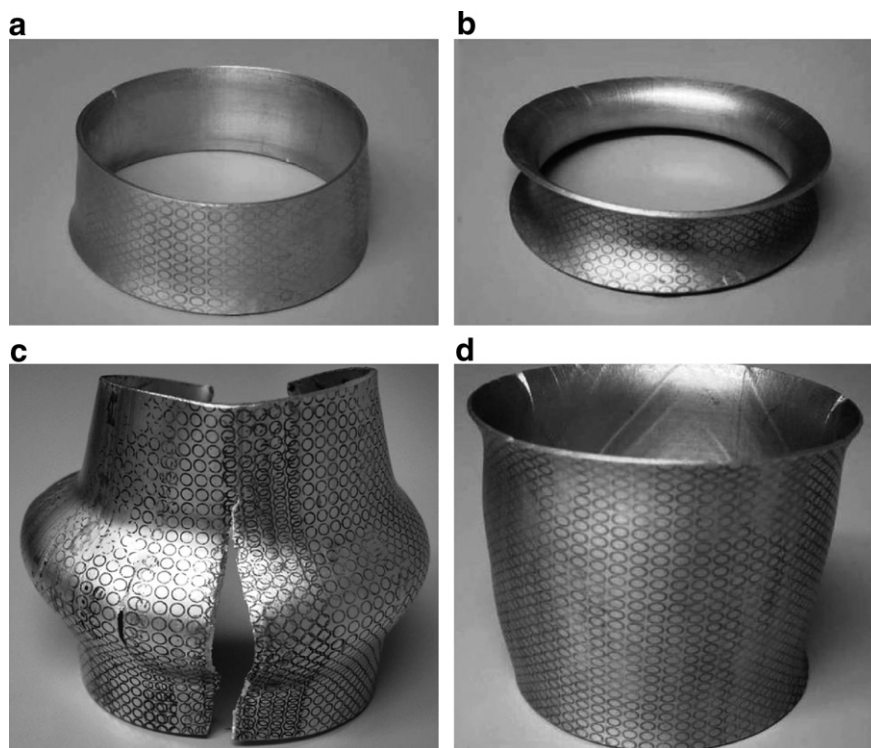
Final configuration showing localized necking of tubes deformed using the experimental EMF setup. (a) 31.7 mm tube deformed with 4-turn coil, (b) 31.7 mm tube deformed with 10-turn coil, (c) 85.1 mm tube deformed with 4-turn coil and (d) 85.1 mm tube deformed with 10-turn coil.
